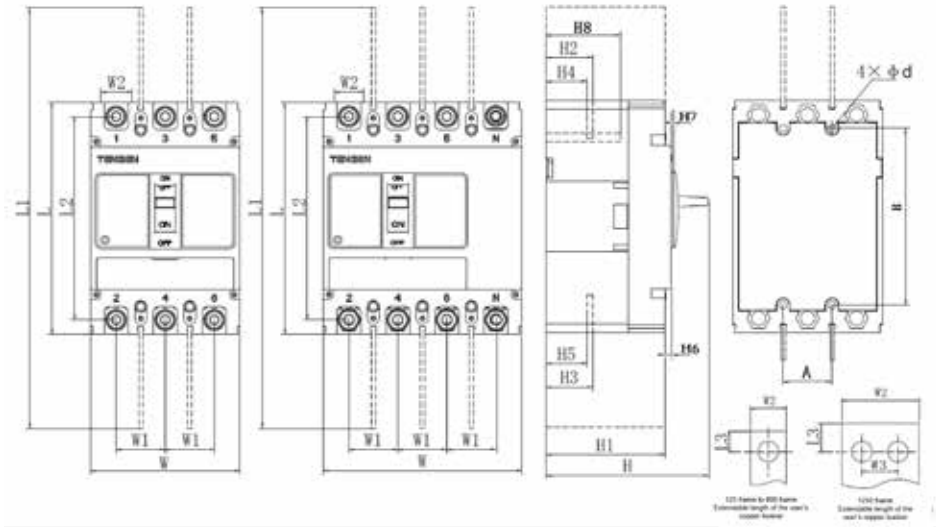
Outline dimensions and installation dimensions of TGM1E
